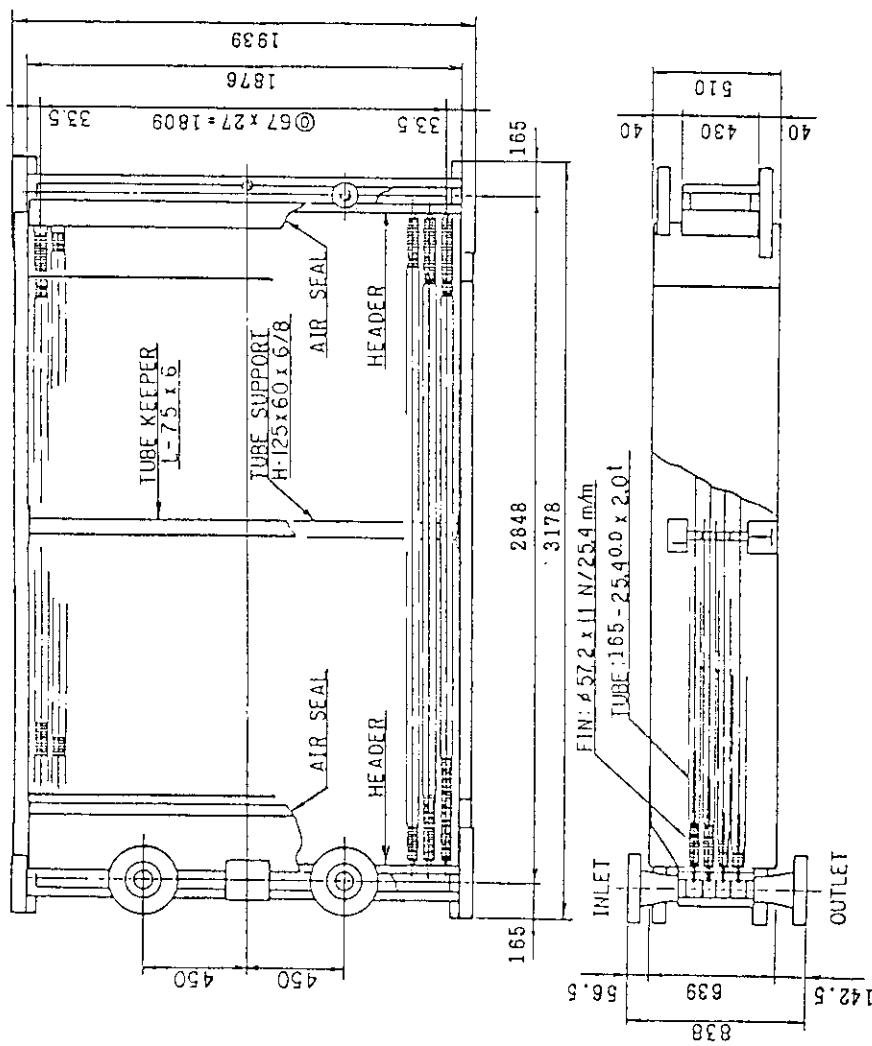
(a) Details of Cooling Tower CT-2
